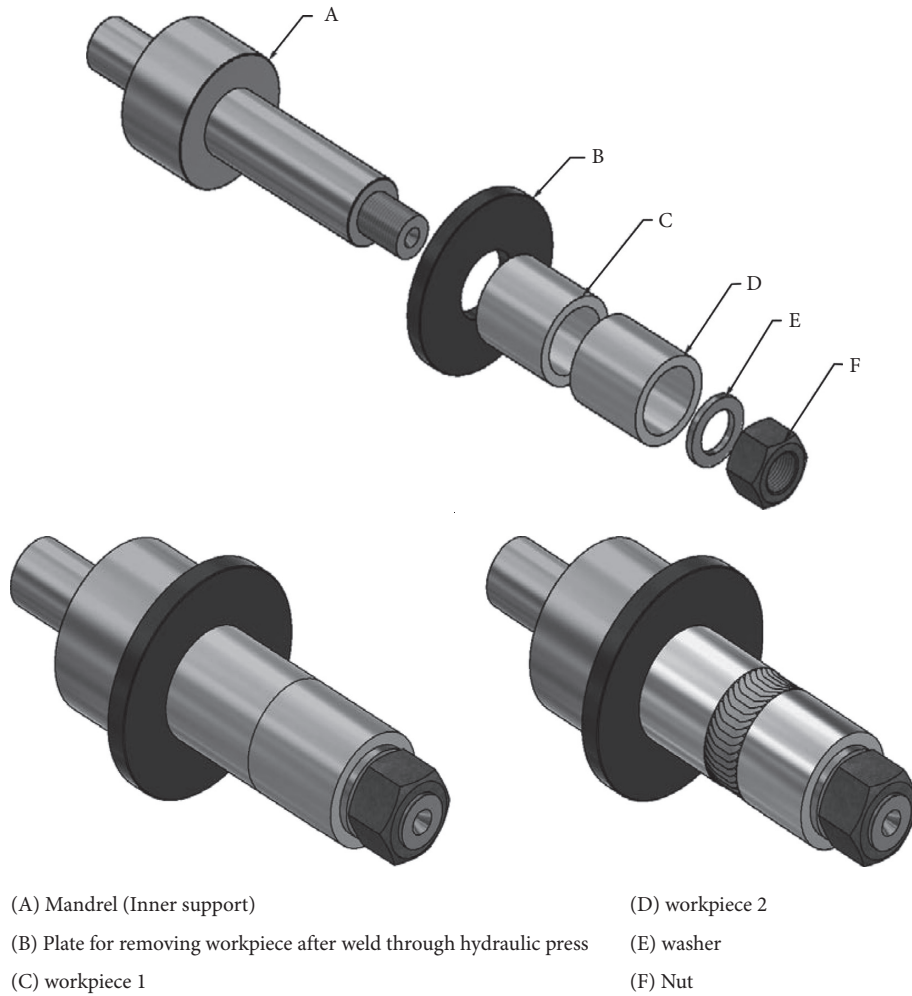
Developed fixture assembly for friction stir welding of AA 7075 aluminium alloys. Developed fixture assembly before and after the FSW process.
